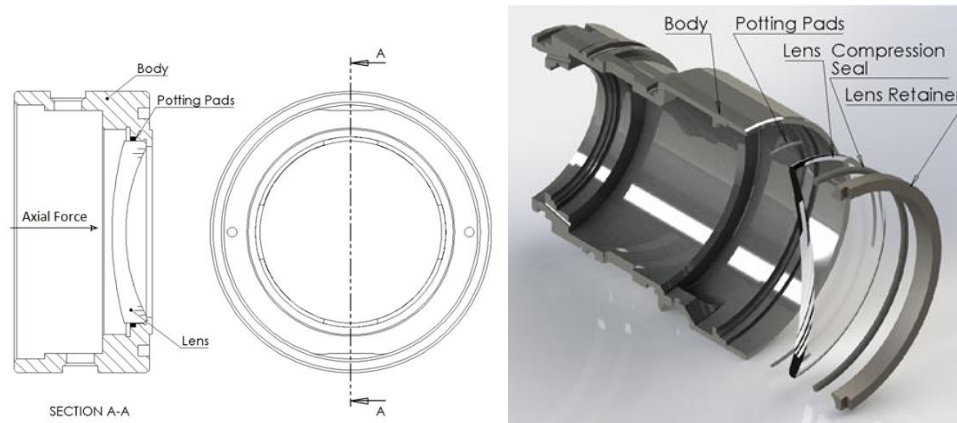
Lens and body cross-section showing exploded view of the parts inside, notably the location of the potting pads which seat the lens to the body.
